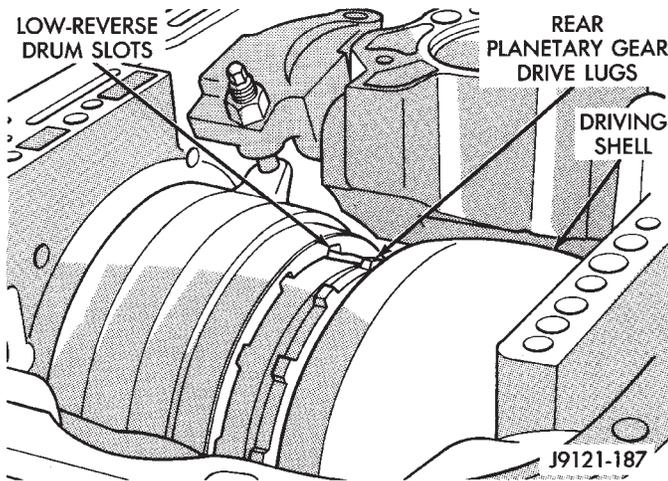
Aligning/Seating Rear Planetary In Low-Reverse Drum
